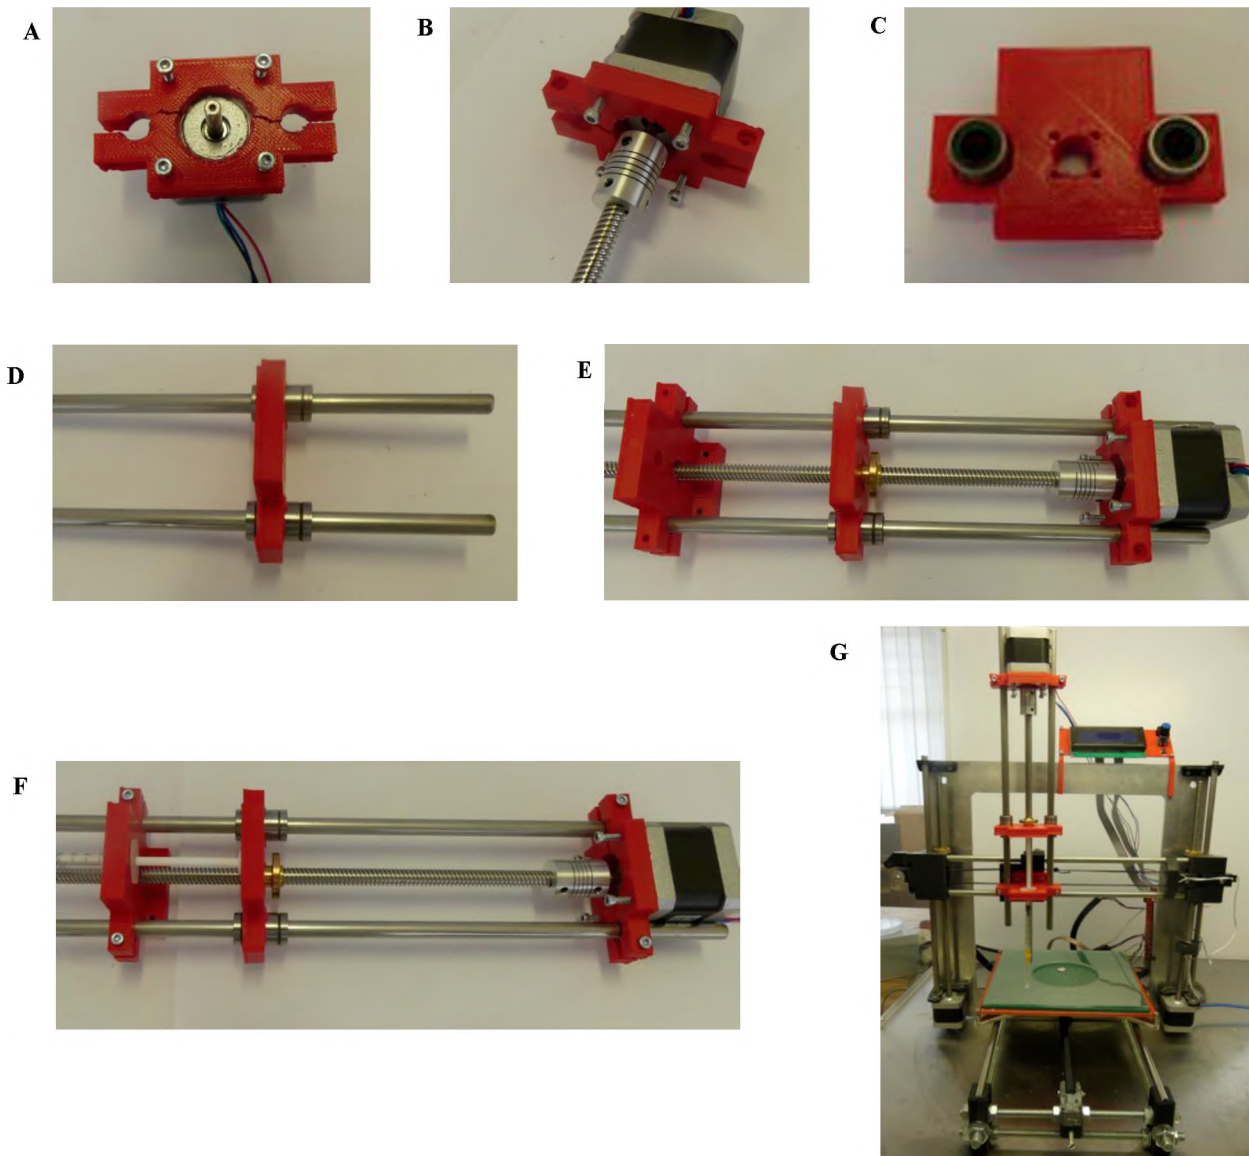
Screw-driven extruder assembly process. A: Stepper motor mounting. B: Lead screw attachment. C: LM8UU linear bearing insertion. D: Smooth rod incorporation. E: Stepper motor mount and syringe holder attachment. F: Smooth rod attachment. G: Prusa i3 mounting.
